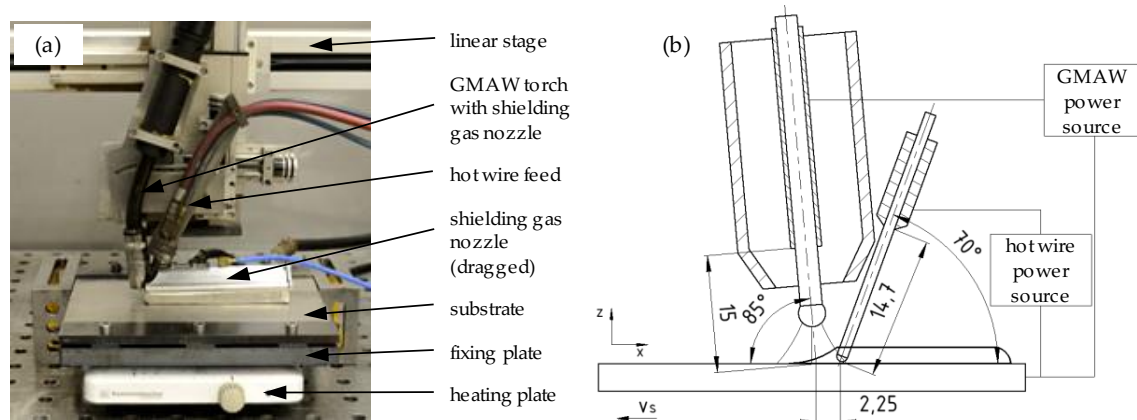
(a) Experimental setup of the gas metal arc welding process (GMAW) with additional hot-wire process and (b) schematic depiction of the GMAW process with additional hot wire process with geometric parameters.
